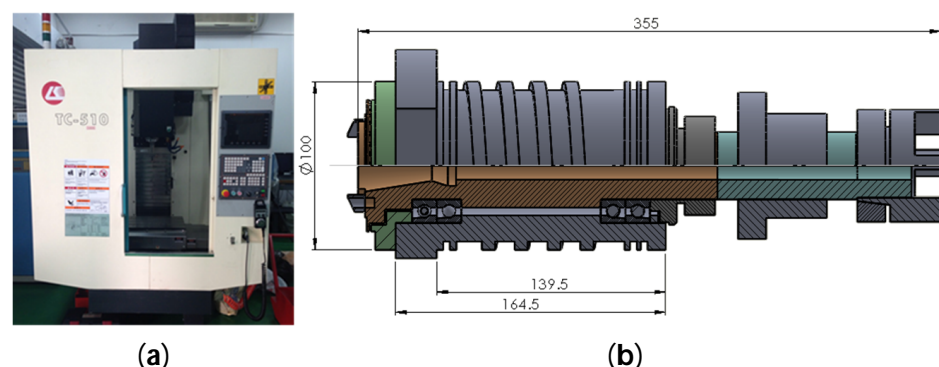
Milling machine and detailed drawing specification of a spindle used for experiments: (a) milling machine; (b) spindle unit.
